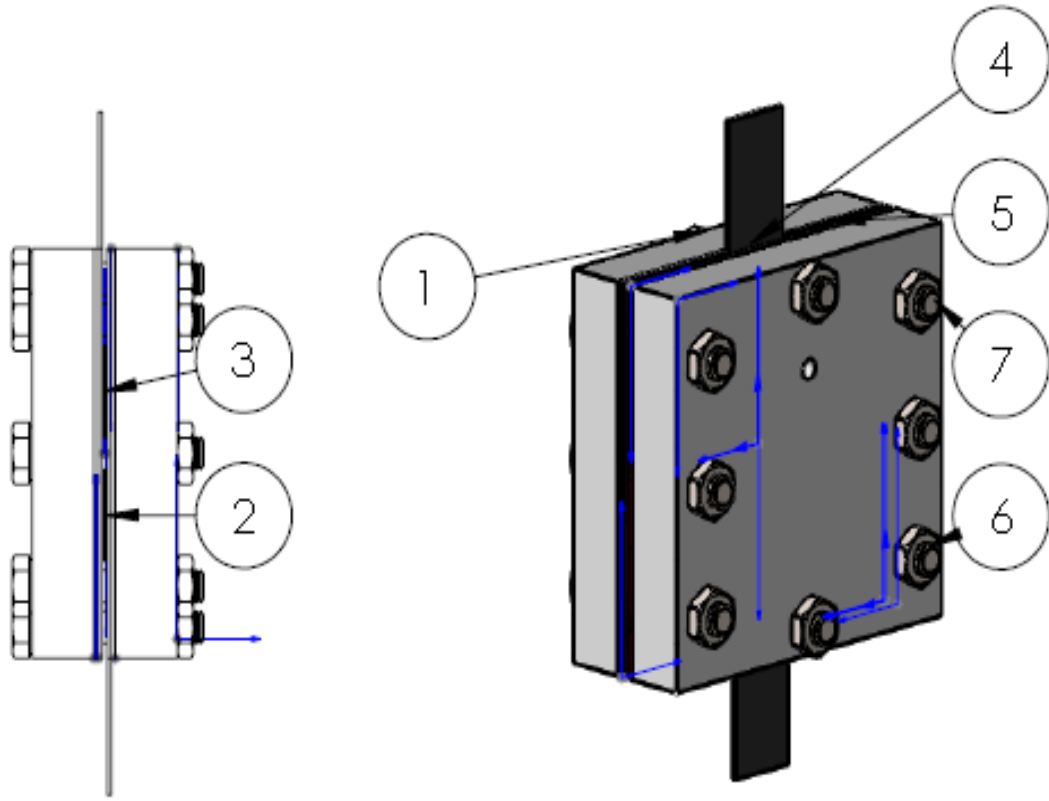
Drawing showing CDI cell after being assembled (number 6 and 7 represents bolts and hexagon thin nuts respectively)
